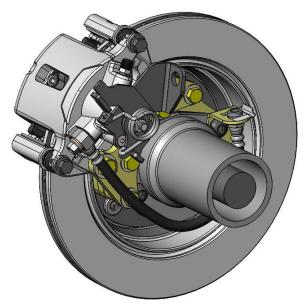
Brake Hose Attached at the Rear Axle Housing (DB1572BR LH Side Shown)
